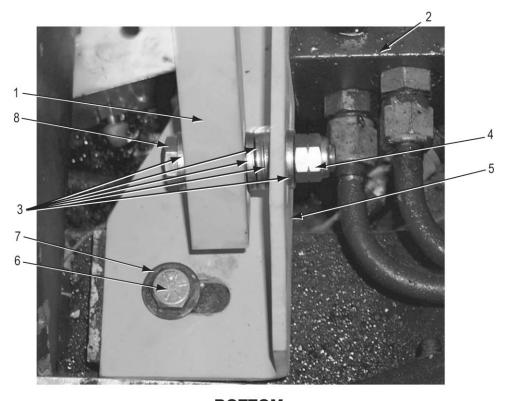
Attaching Outboard Weldment Bracket to Primary Manifold Assembly
